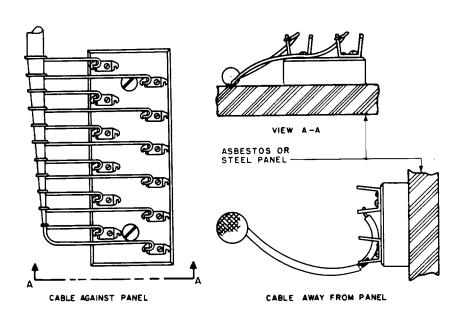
Connecting Blocks — ED-80504-01 and Similar Types — No. 14 Gauge and Smaller Wires
